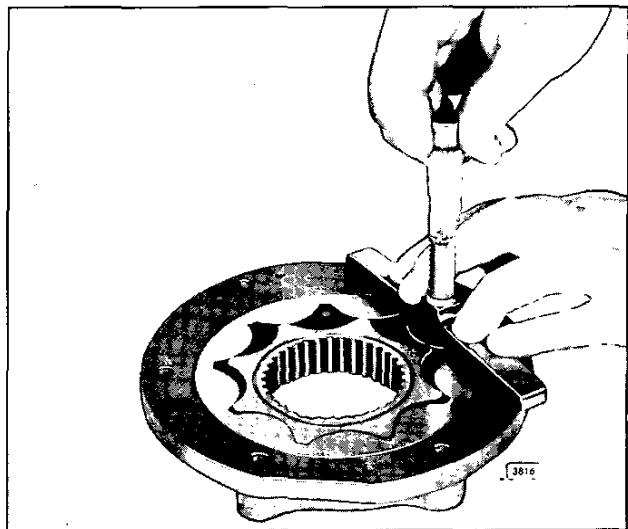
Measuring Clearance from Face of Pump Body to Side of Rotor
